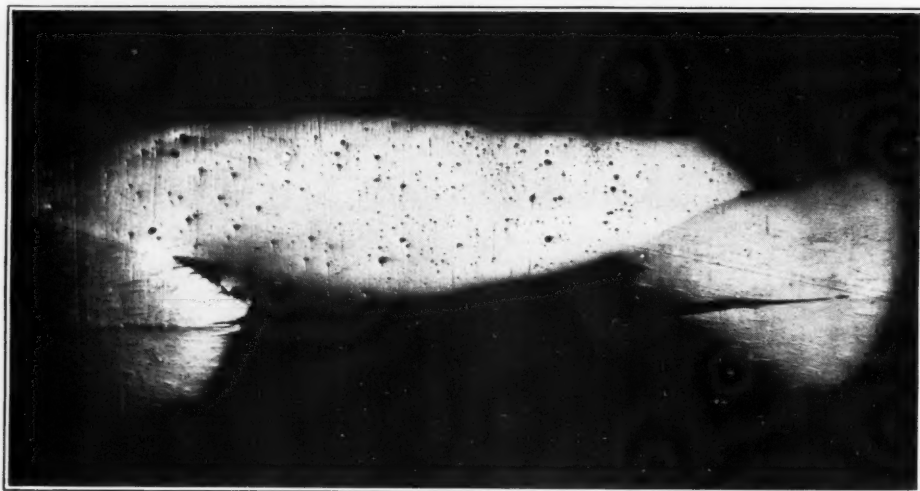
Entire joint, showing both ends of wire and the solder.
